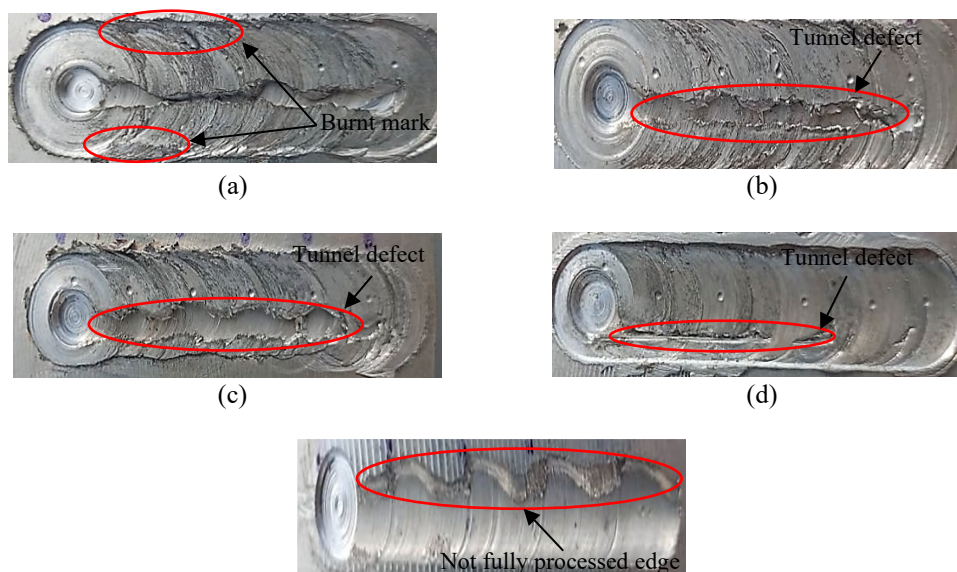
The surface morphology on FSPed Mg-Micro Al_2O_3 workpiece using tool shoulder diameter of (a) 20 mm, (b) 18 mm, (c) 15 mm, (d) 12 mm, and (e) 9 mm
